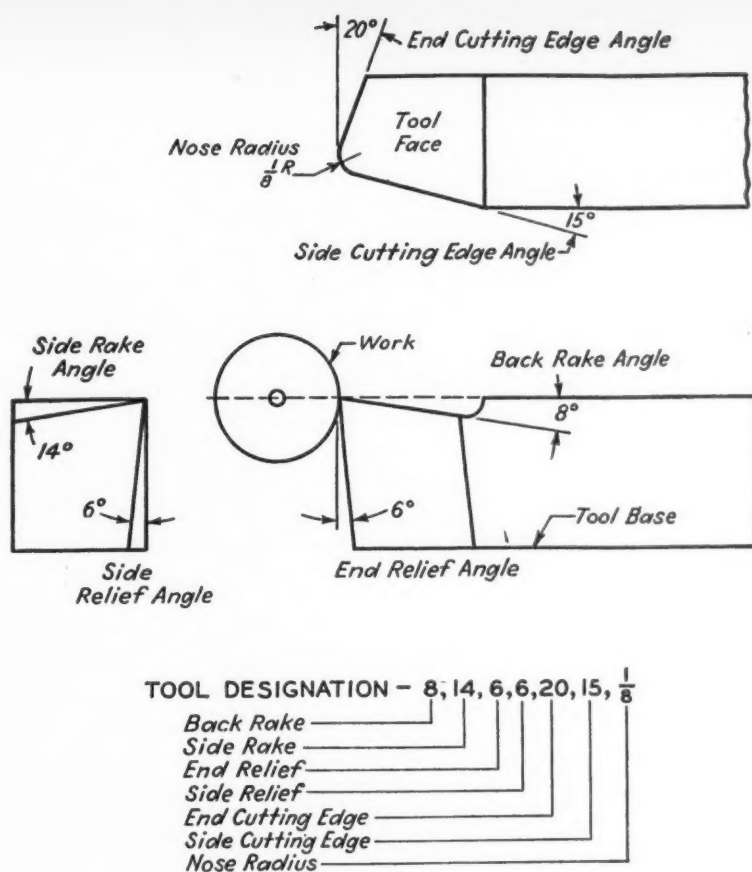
Typical Solid Tool of High-Speed Steel Ground for Heavy Turning Steel of About 250 to 300 Brinell
